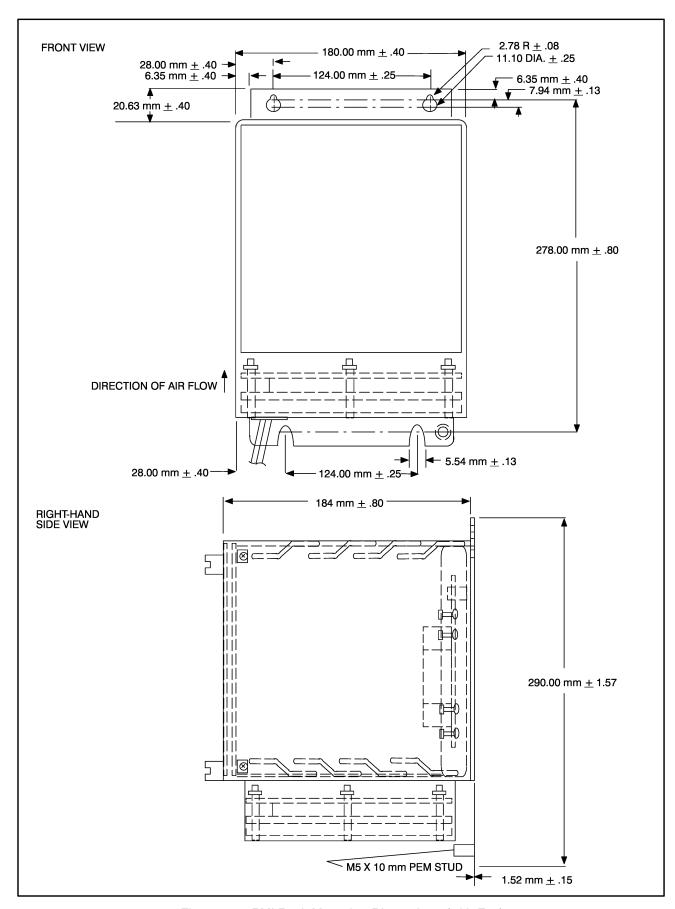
PMI Rack Mounting Dimensions (with Fan)
